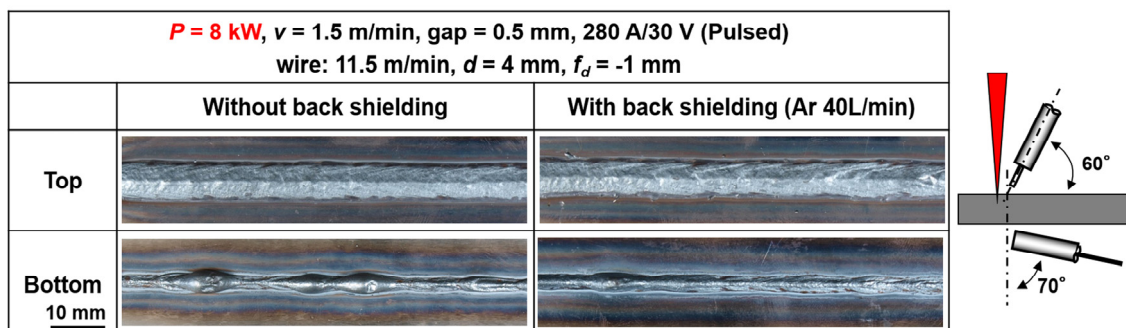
Effect of back shielding gas on surface appearances in hybrid welds produced at laser of power of 8 kW.
